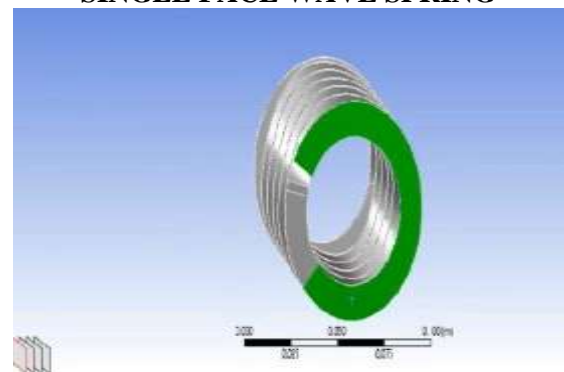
GEOMETRIC VIEW OF SINGLE FACE FIXED SUPPORTING
